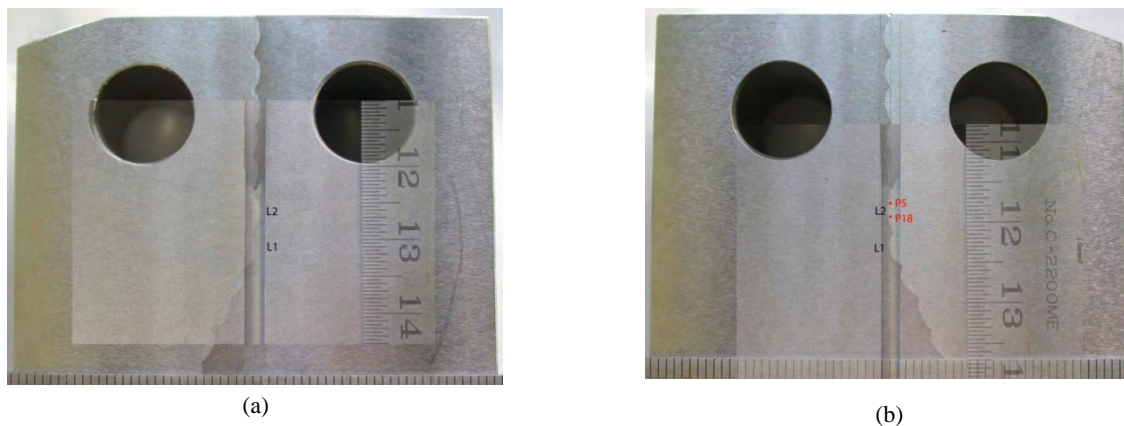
Specimen N152-LAS-1, overlapped images before and after the specimen notch was machined: (a) side 1, and (b) side 2.
